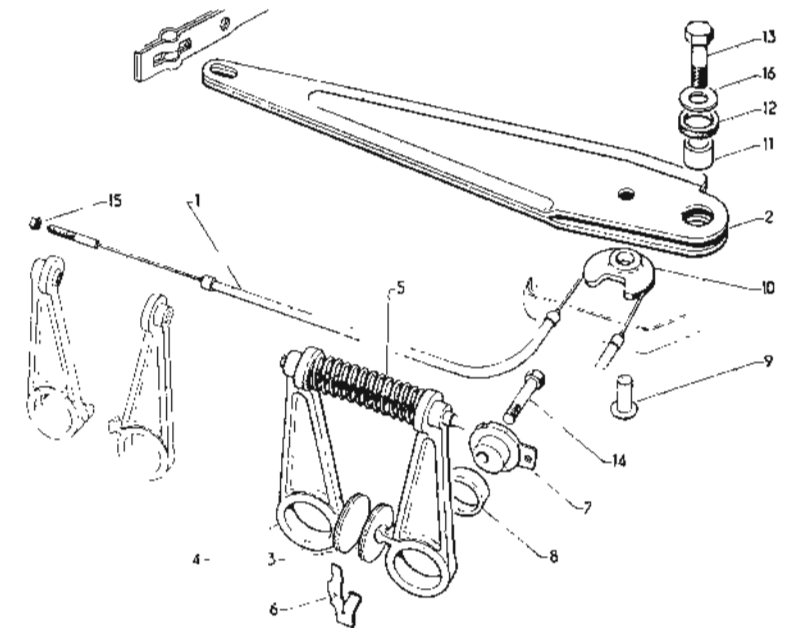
PARKING BRAKE CABLE ASSEMBLY.
